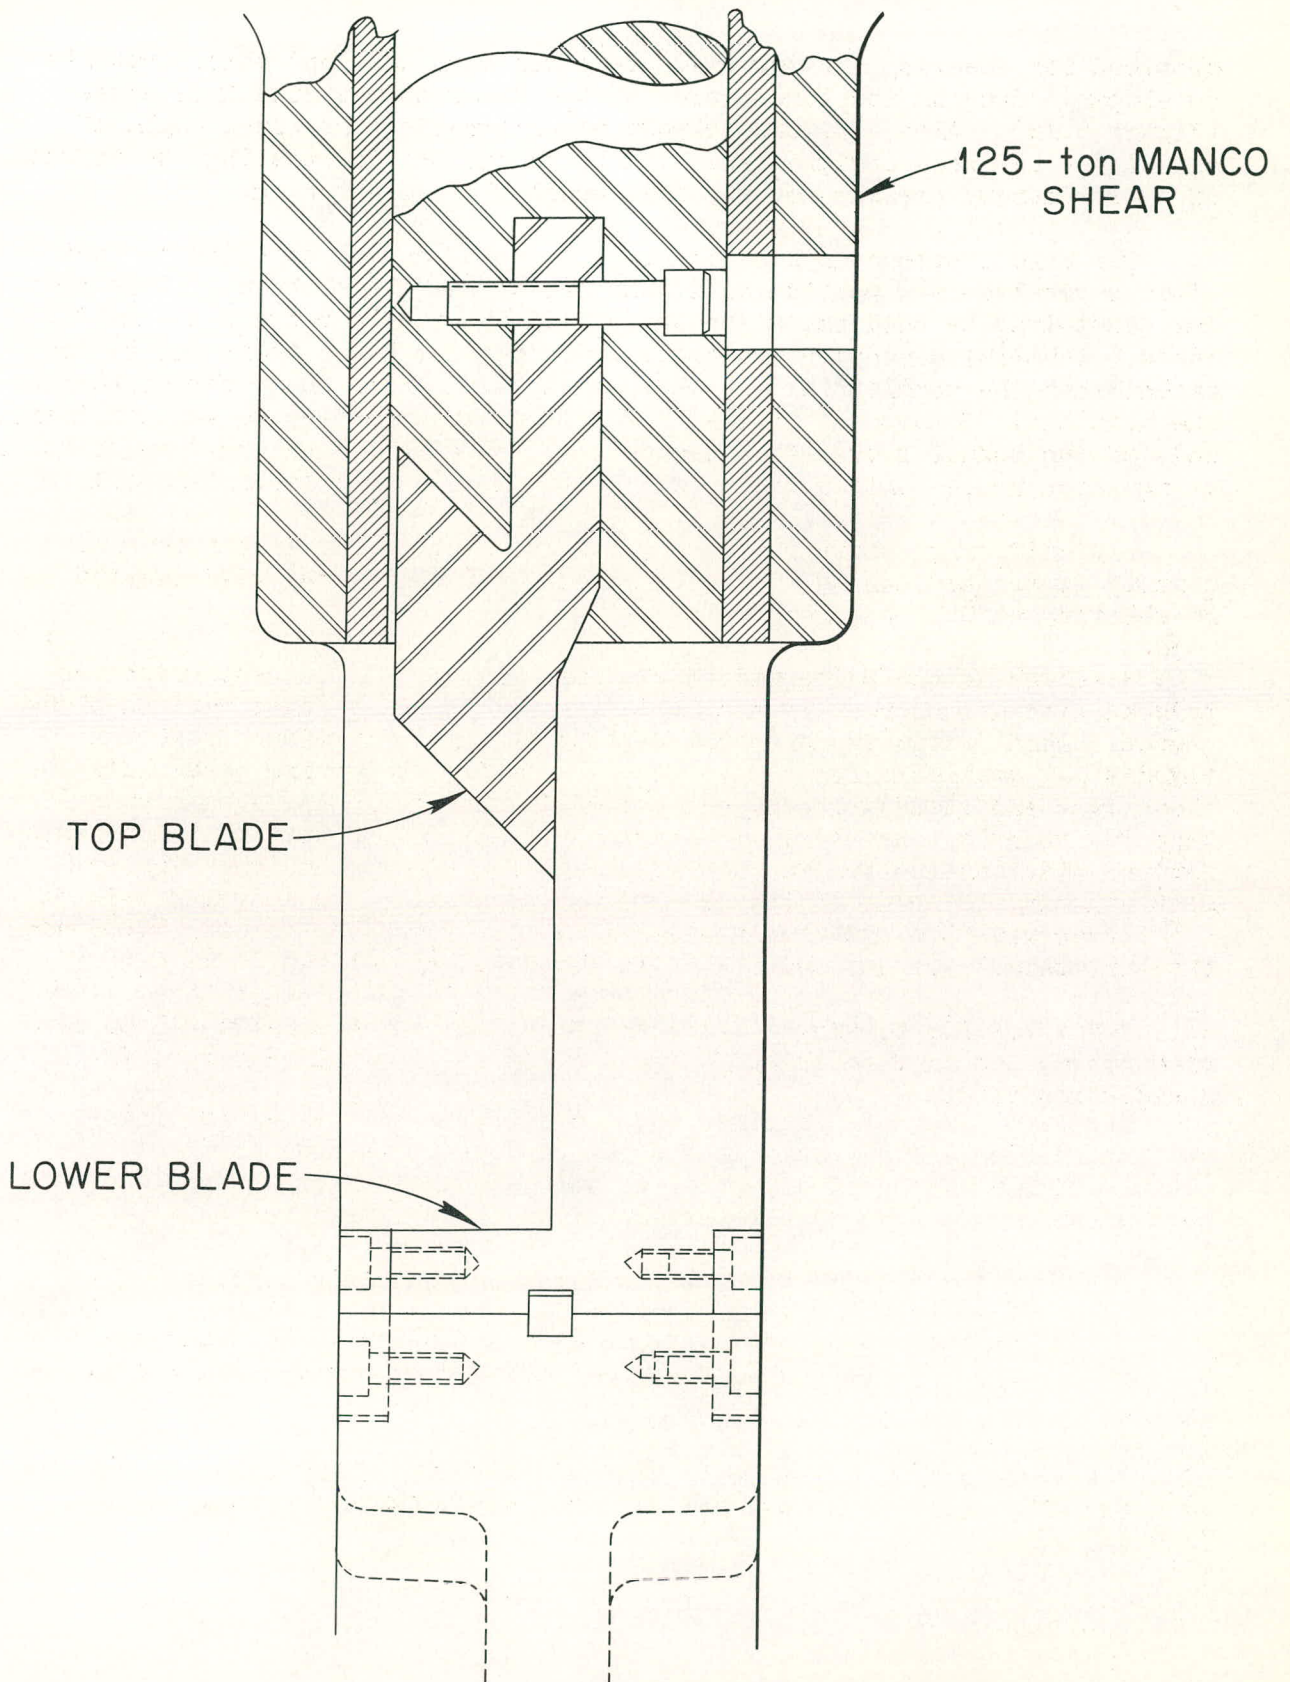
Revised Blade for Shearing $3\frac{7}{8}$ -in. Square Prototype Fuel Bundle.
